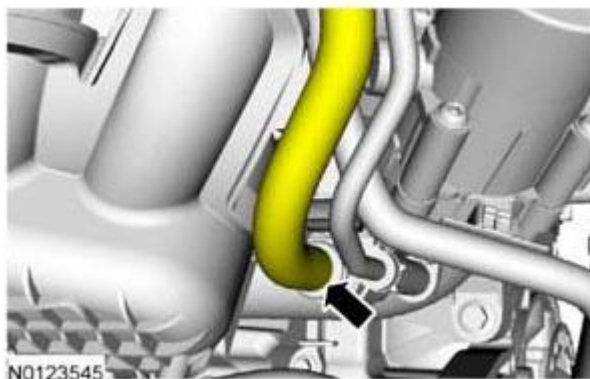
Locating Brake Booster Vacuum Tube To Intake Manifold
